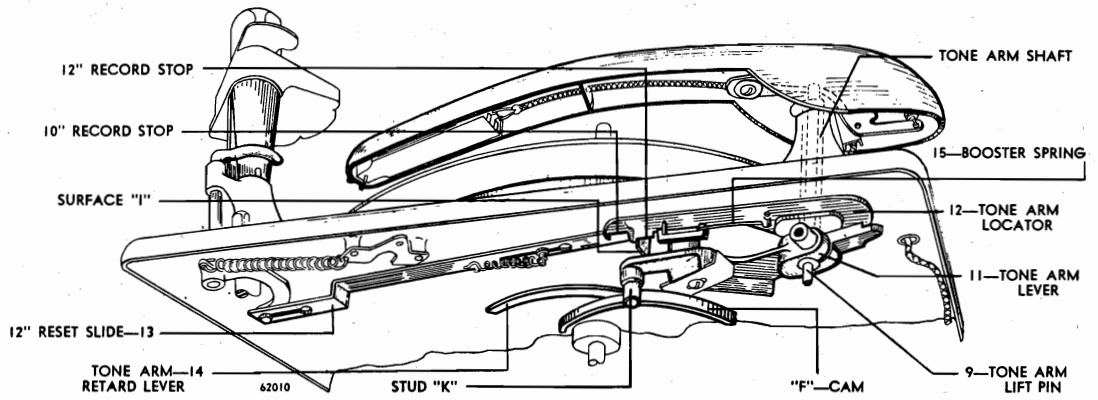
CUTAWAY BOTTOM VIEW DRIVE GEAR
